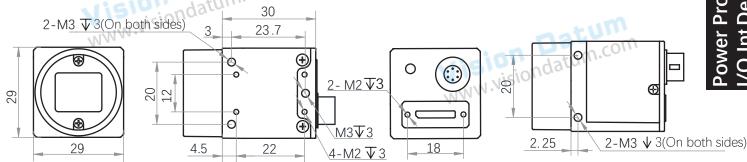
29 mm×29 mm×30 mm Mechanical Dimensions (in mm) of the LEO2 USB3.0 camera with 4 sides for flexible mounting.
